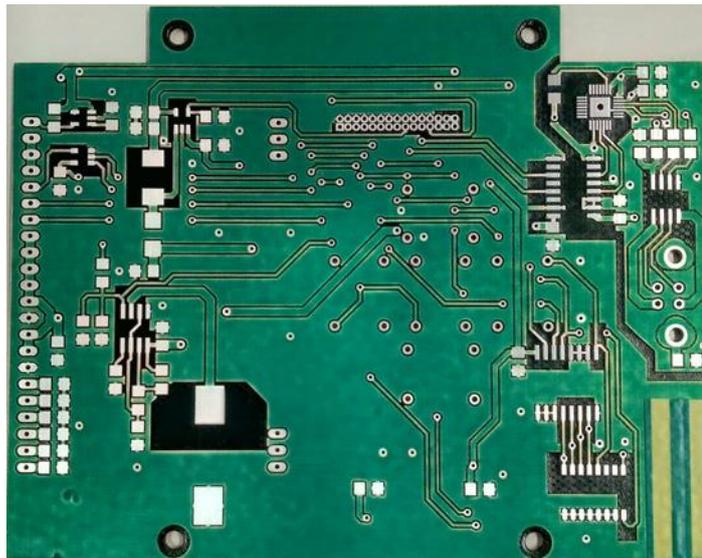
Double-sided printed circuit board produced in the prototyping laboratory of PTB Berlin
